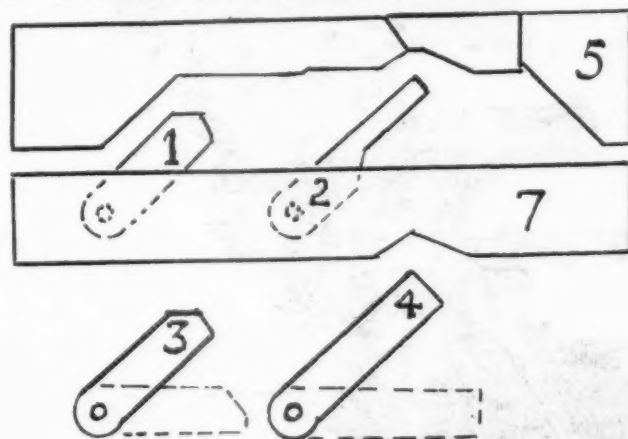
Dial Cam System with Needle Retracting Cam Removed
